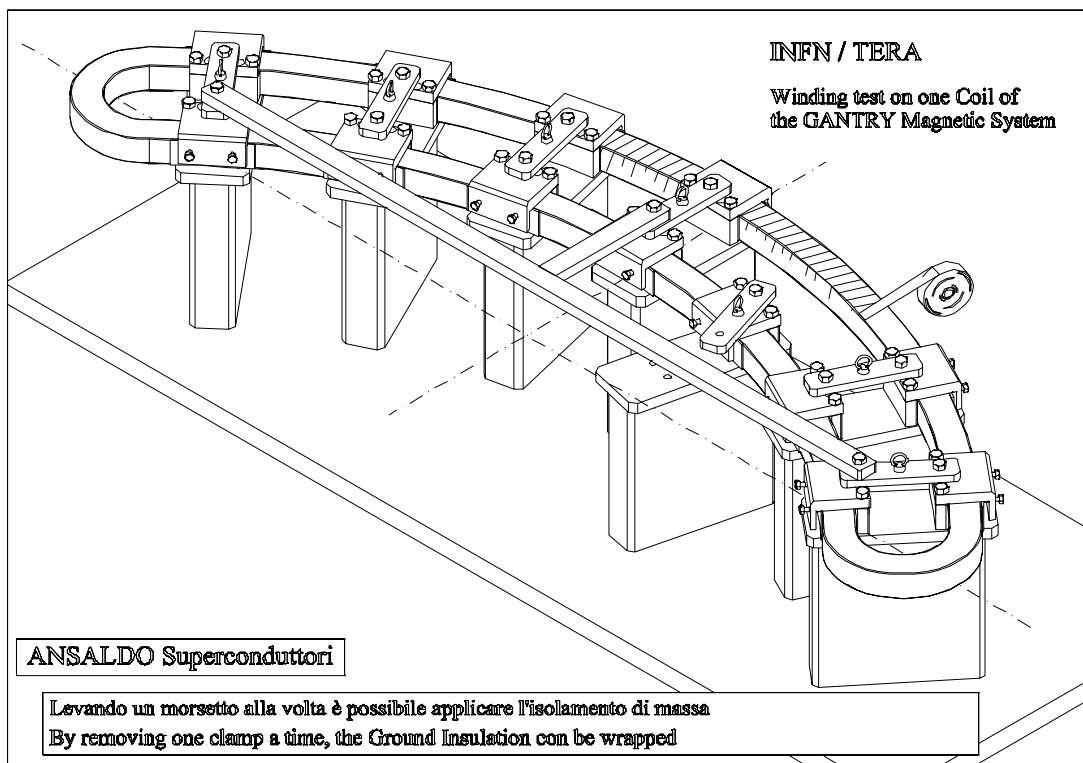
Clamped coil removed from the winding tool for the next operation.
